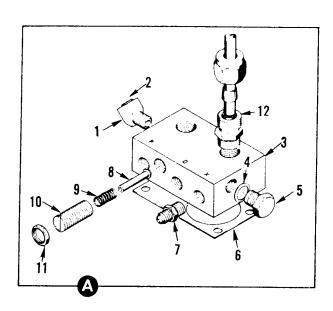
Exploded View of Model 5013-07 Hydraulic Power Unit and
